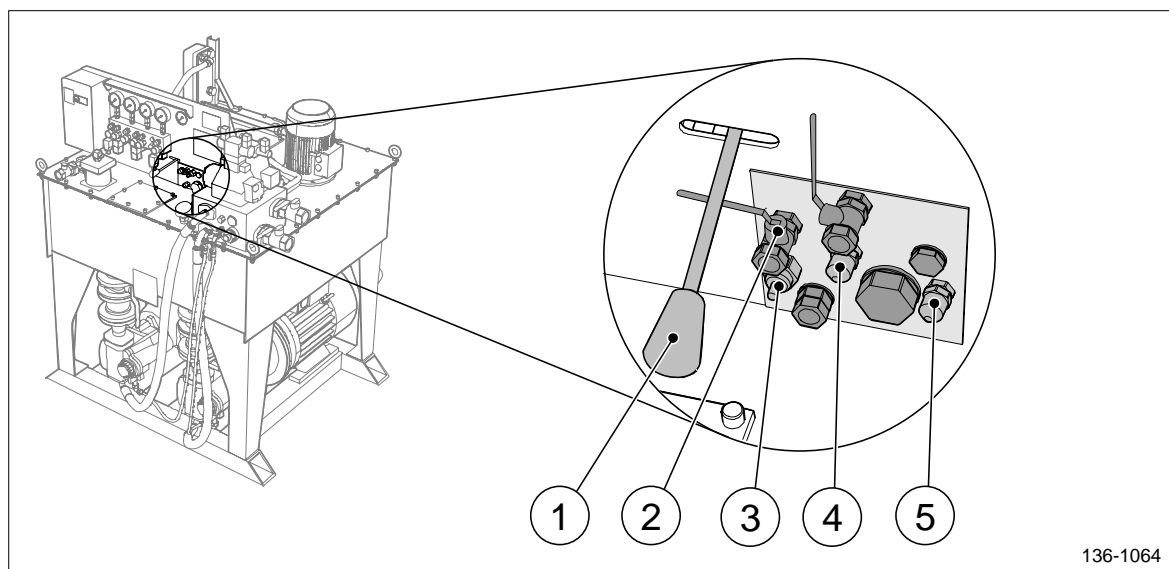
The emergency operating control panel on the hydraulic power pack unit.
